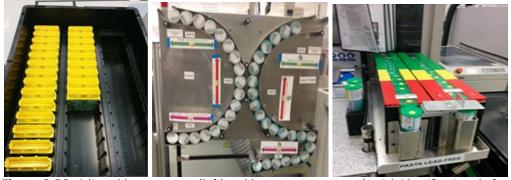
Adjustable separators (left), solder paste storage and quick identification: before (middle) and after (right)
